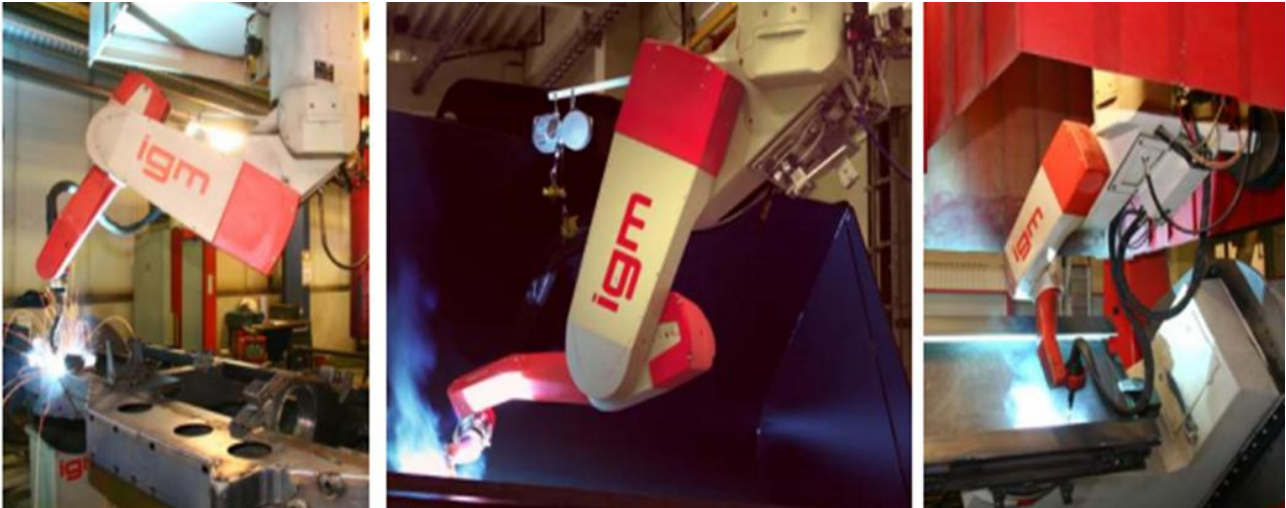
Robot welding parts RTi330 famous Austrian companies IGM
